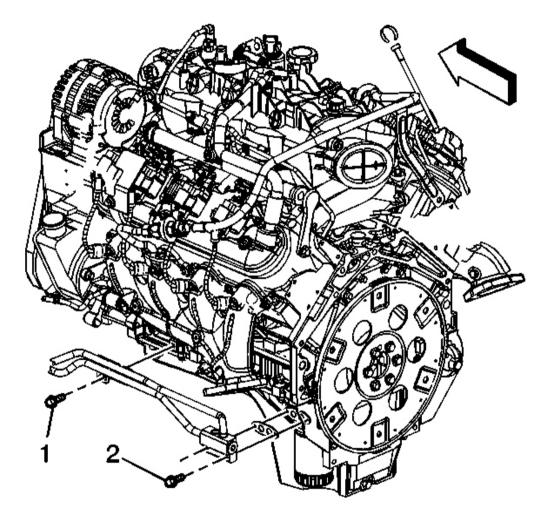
Oil Cooler Hose Bracket Bolt & Adapter Bolts Courtesy of GENERAL MOTORS CORP.
